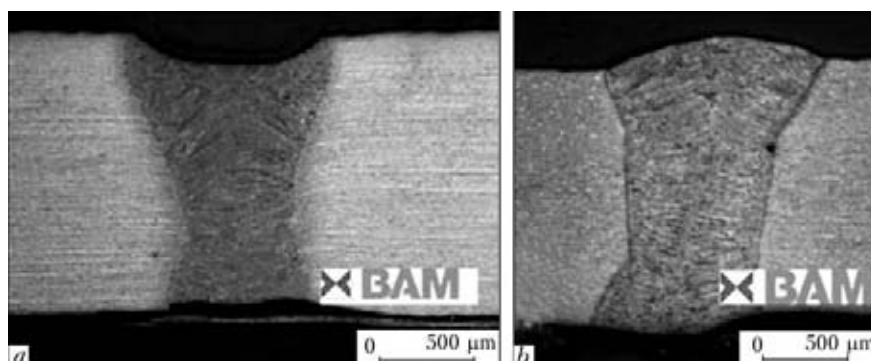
Butt weld with shear (a) and laser (b) cut edges
